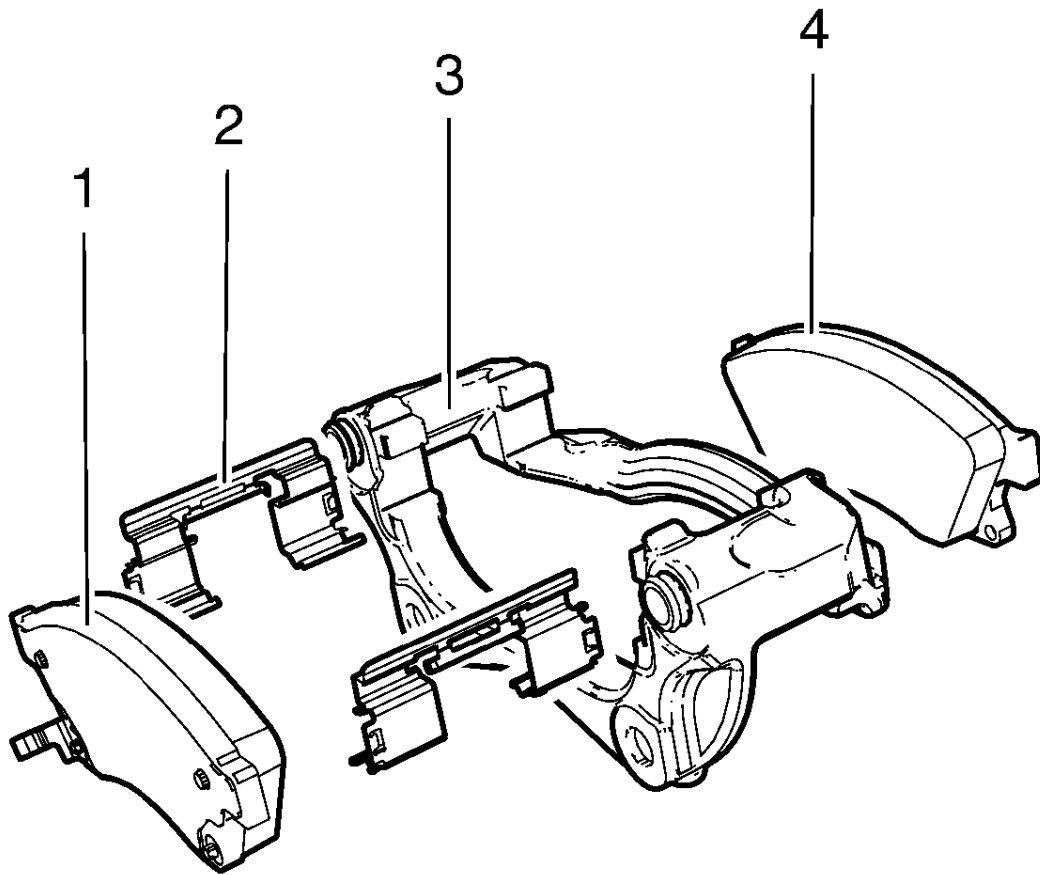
Exploded View Of Brake Pads And Brake Caliper Mounting Bracket
